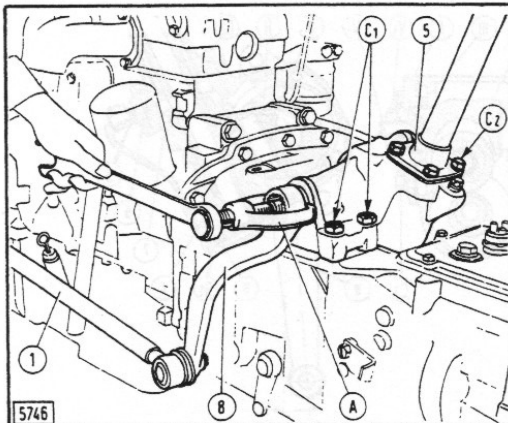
Removing steering arm (8) from steering box nut shaft by puller. (C1) Steering box self-locking screws. (C2) Cover. (5) Screws. (1) Drag link. (5) Top cover with steering column.
